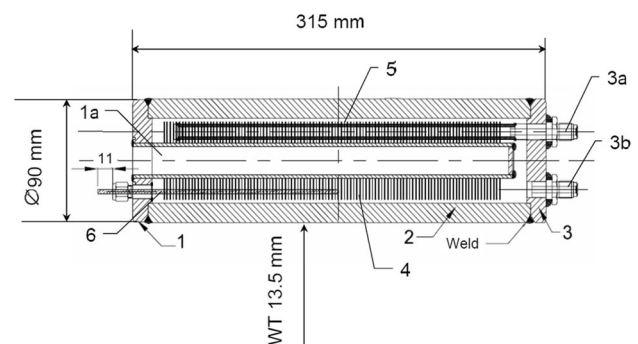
Assembly drawing of the MH container. 1—bottom SS flange (1a—space for electric heater), 2—shell (SS tube), 3—top flange (3a—H₂ input/output, 3b—MH loading), 4—heat exchanger (SS tube/Al fins), 5—filter (porous SS tube) and 6—thermocouple
